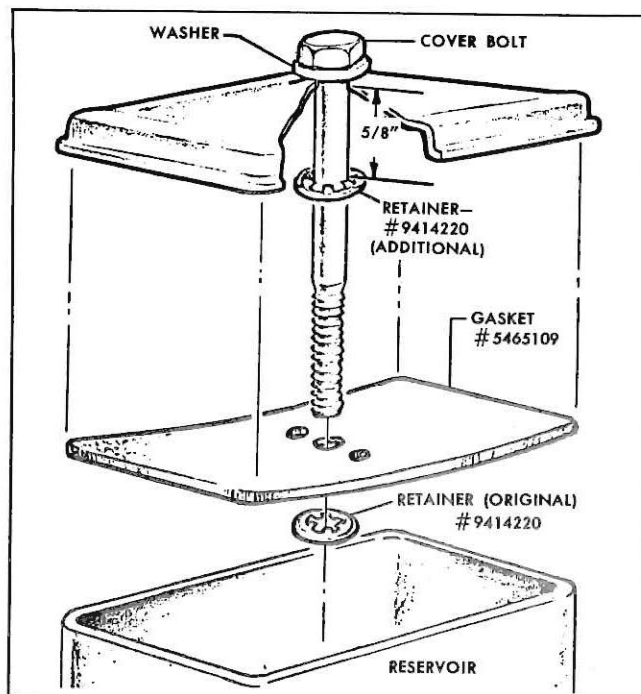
Rework of Brake Master Cylinder Cover Assembly
